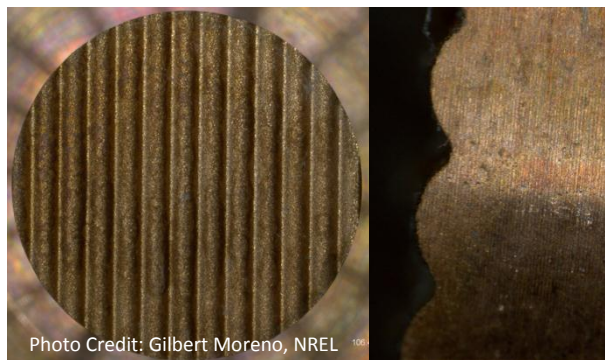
18 AWG surface target: Top view (left), side view (right).
